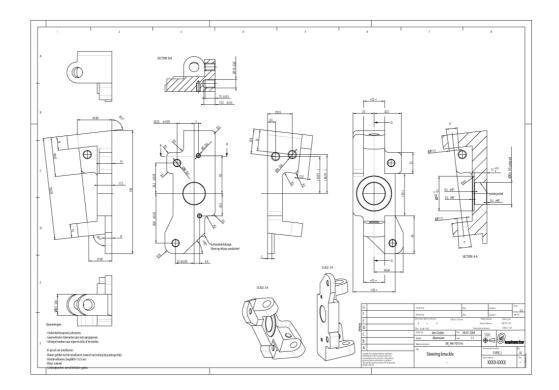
An Example of Engineering Design Detail Drawing. Source :< http://www.do-engineering.nl/engels/?services,2>18/10/2010
